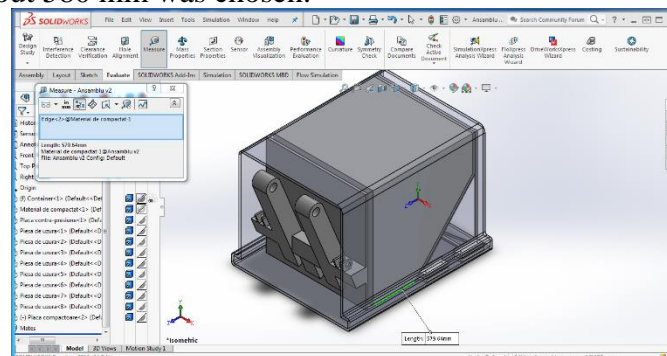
The assembly introduced in the Motion Study module, [54]
